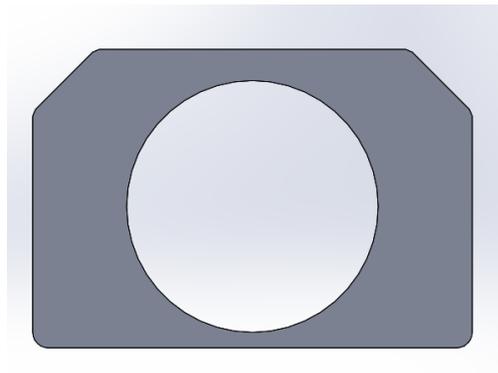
Support Plate in Final Idle End Design, Shaft Housing
